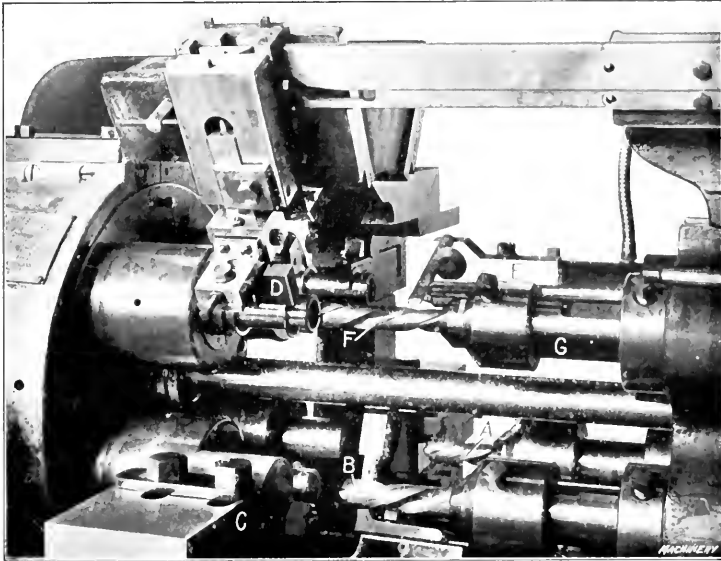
A Motorcycle Hub which is produced economically on the "Acme" Multiple-spindle Machine by means of a Commendable Tooling "Set-up"
